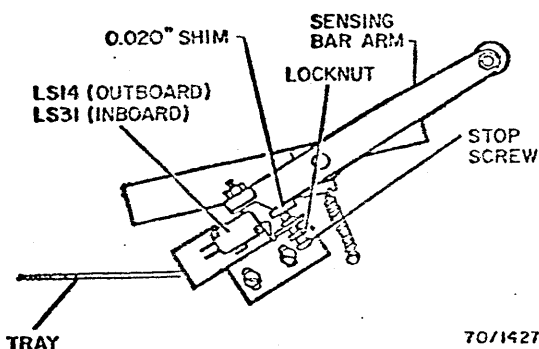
Sensing Bar Switch LS14 Overtravel
